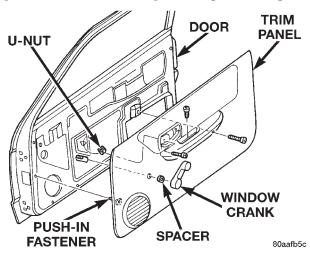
Front Door Trim Panel Remove/Install - Manual Window
